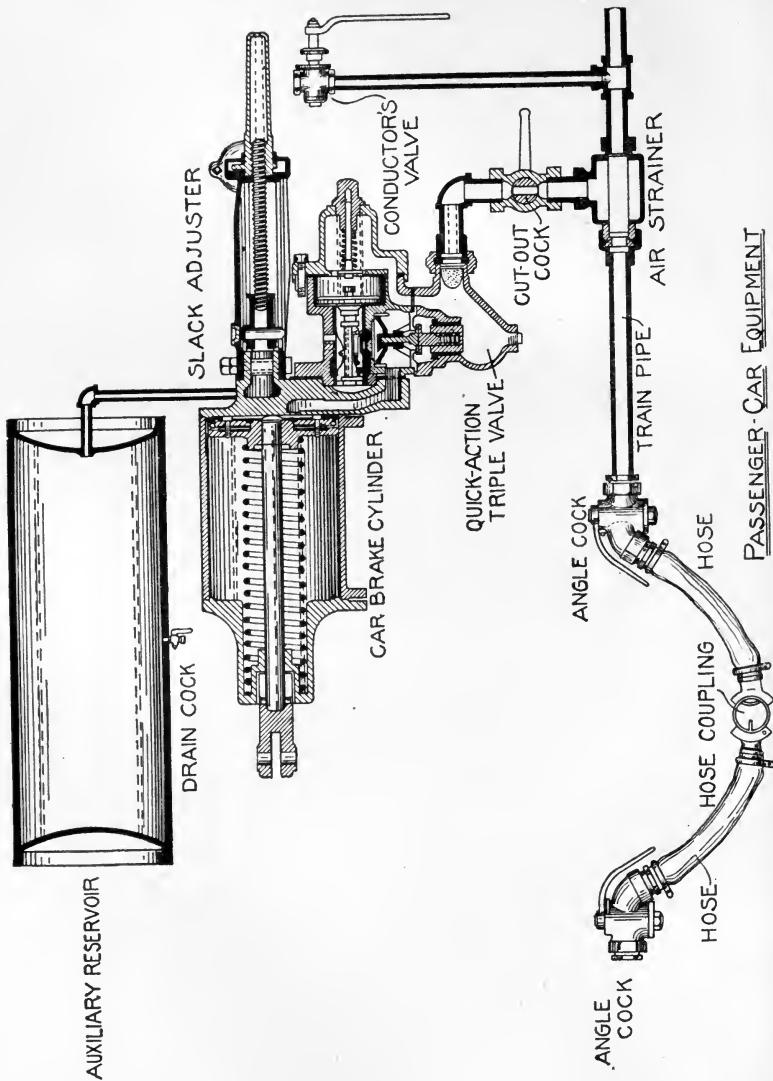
Passenger-Car Equipment, Westinghouse Air-Brake System.
